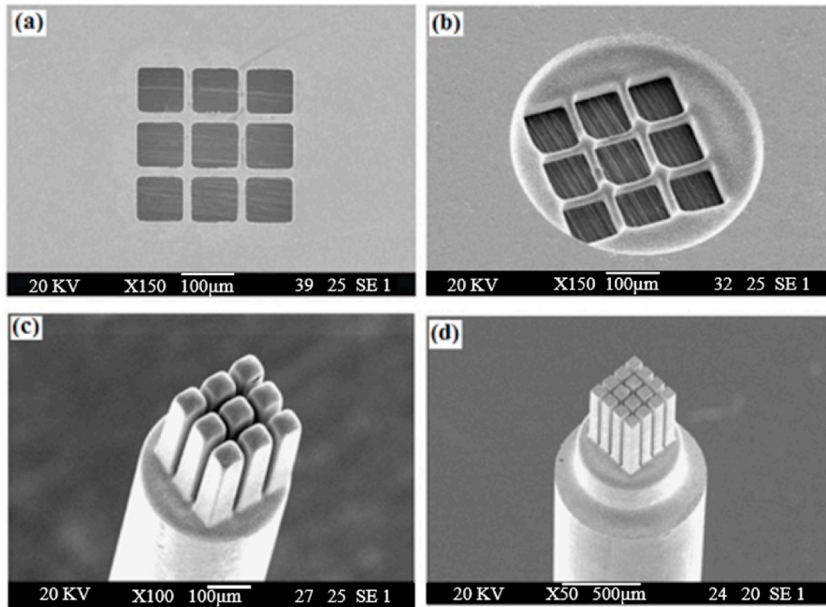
Tool plate consisting of the micro-holes (a) prior to machining, (b) post-machining, and (c) a combination of micro-rods that have been manufactured [42].
